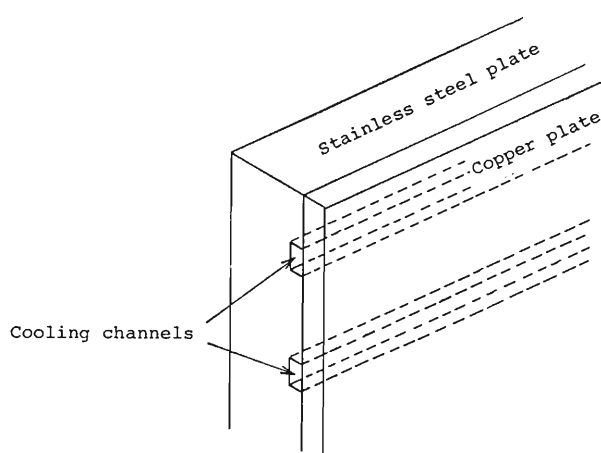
Cross sectional view of the copper-clad stainless steel having water cooling channel.
